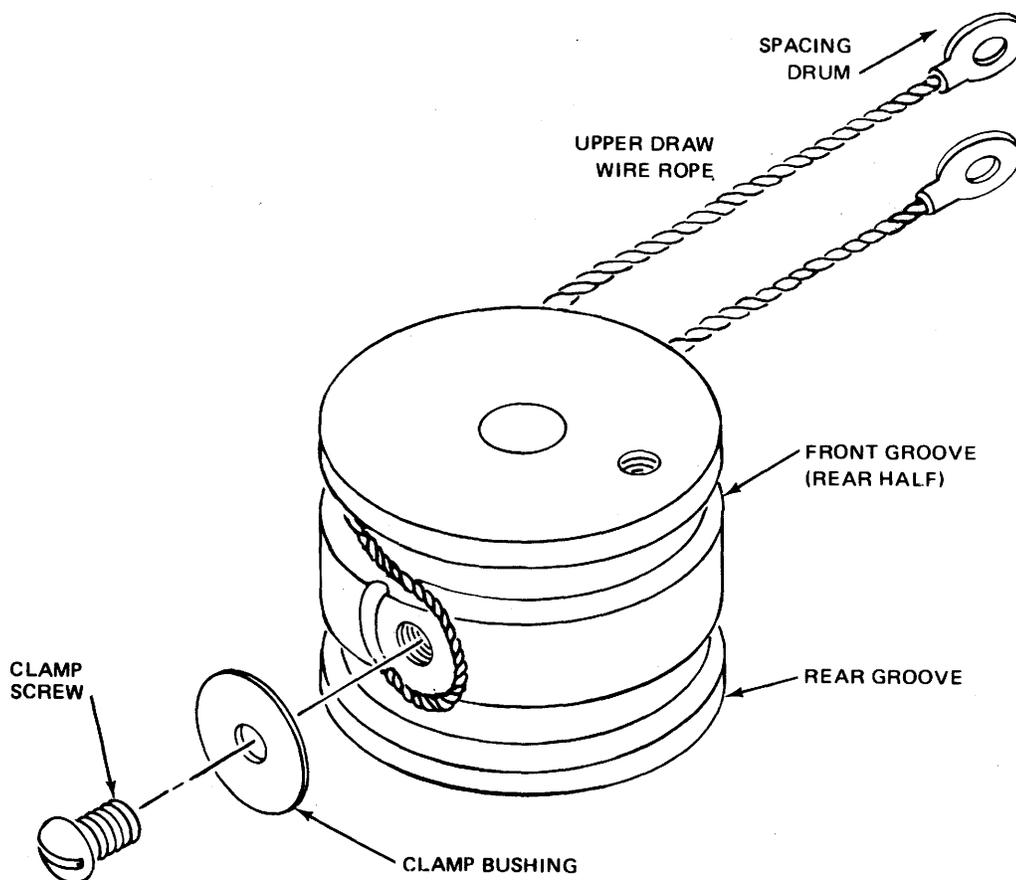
Upper Draw Wire Rope Routing on Spring Drum (Bottom View).
